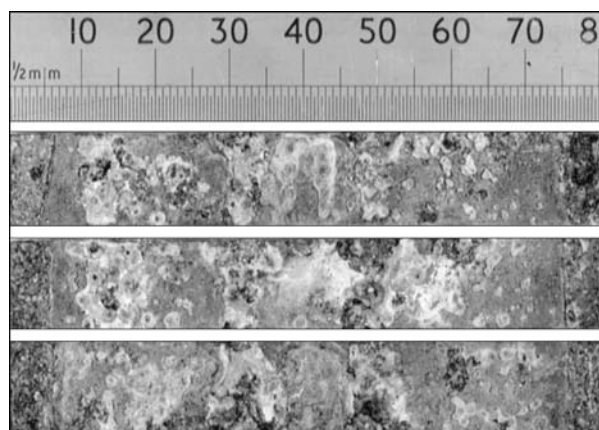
Appearance of samples of welded joints of alloy 2024 after corrosion testing at 210 MPa load for 40 days
